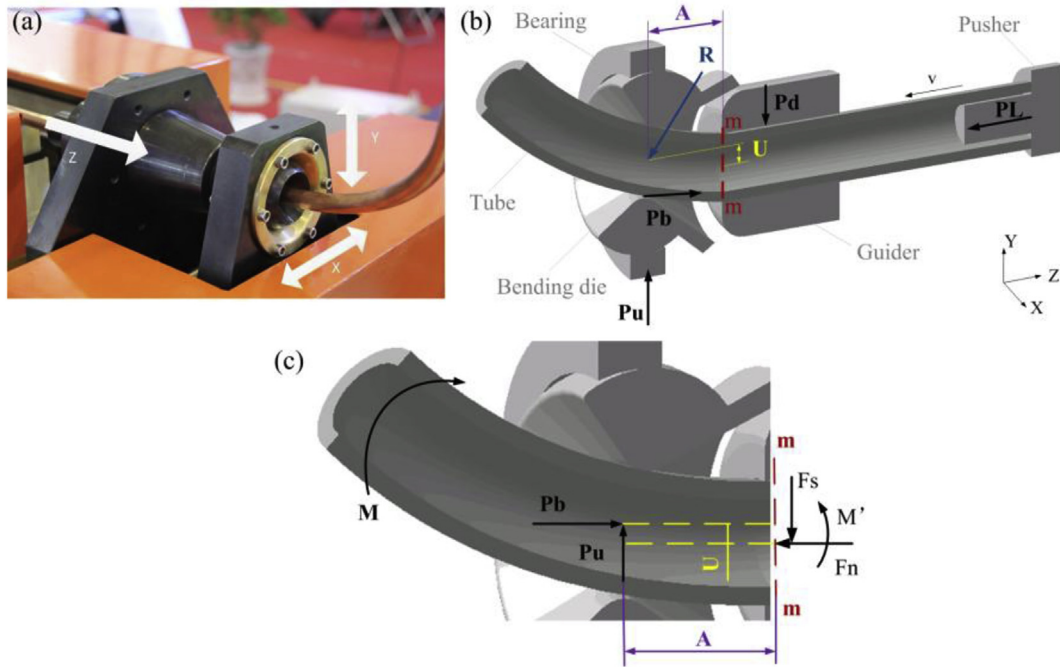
Three-axis free-bending: (a) forming equipment; (b) technical principle; (c) bending moment calculation.
